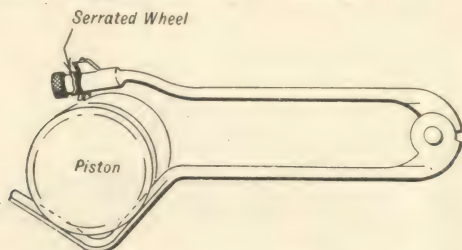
PISTON RING GROOVE CLEANING TOOL
